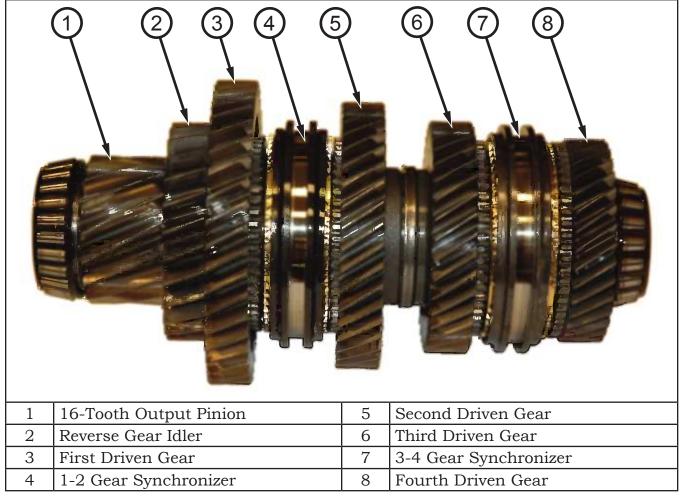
DMT6 1-4 Output Shaft and Synchronizers
